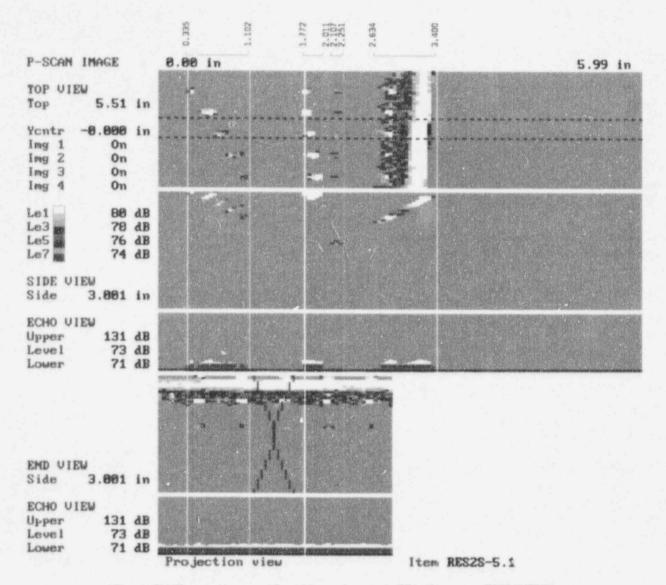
P-scan image with weld overlay, type YY, shown on END VIEW
